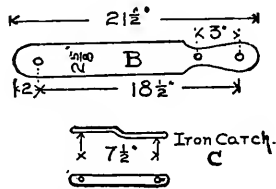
Plan of the Swinging Stanchion "B" with Various Dimensions, Also Details of the Iron Catch "C"—Scale  $\frac{3}{4}$  in. to the Foot.
